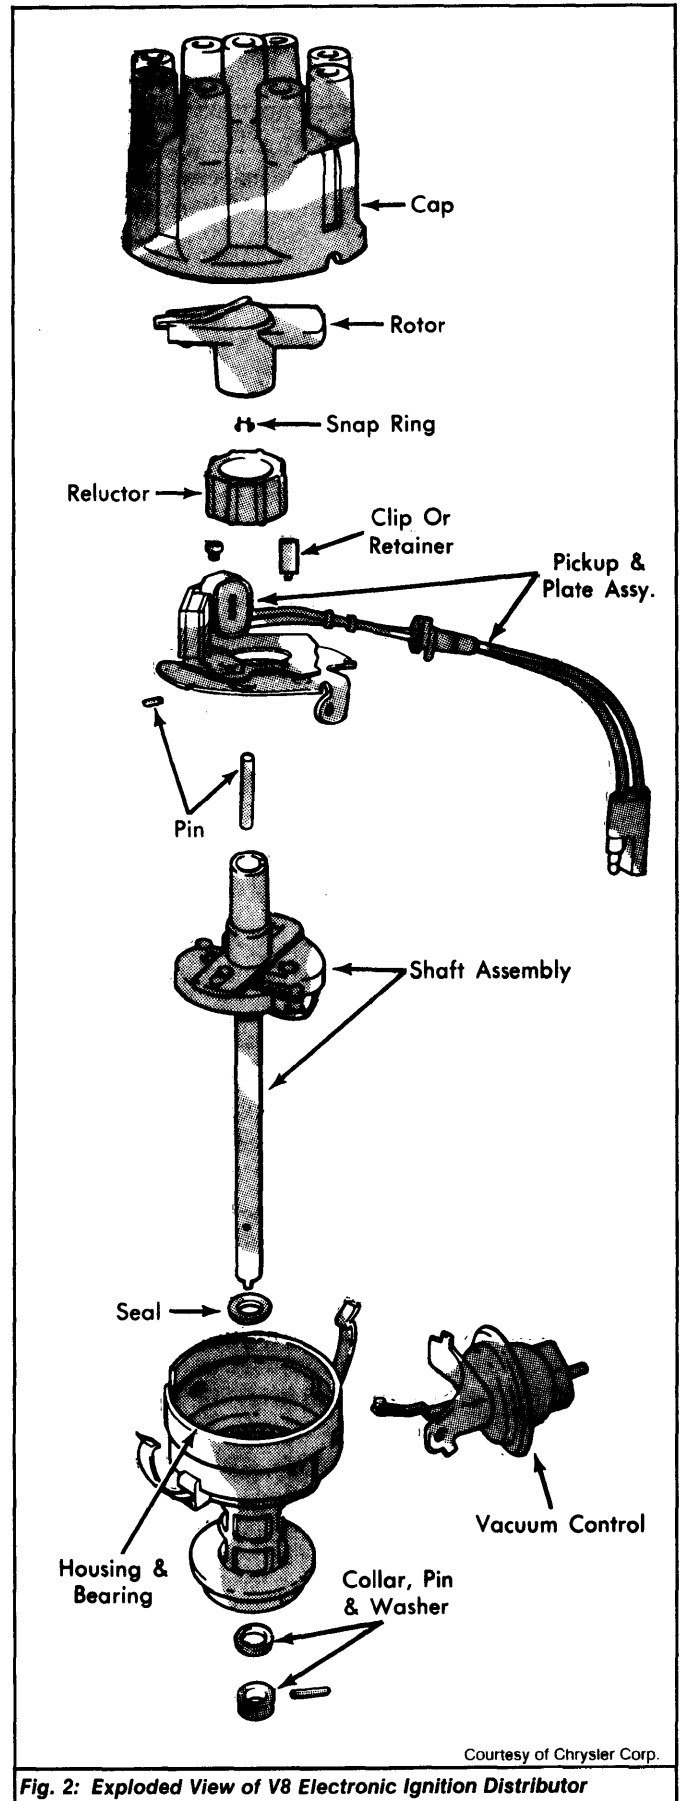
Exploded View of V8 Electronic Ignition Distributor
